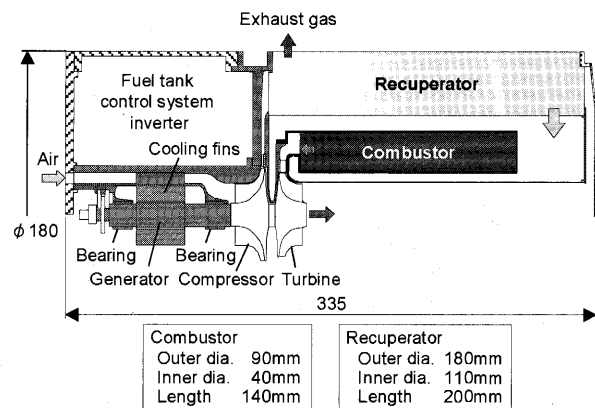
A sectional drawing of a palm top gas turbine⁽⁴⁾
